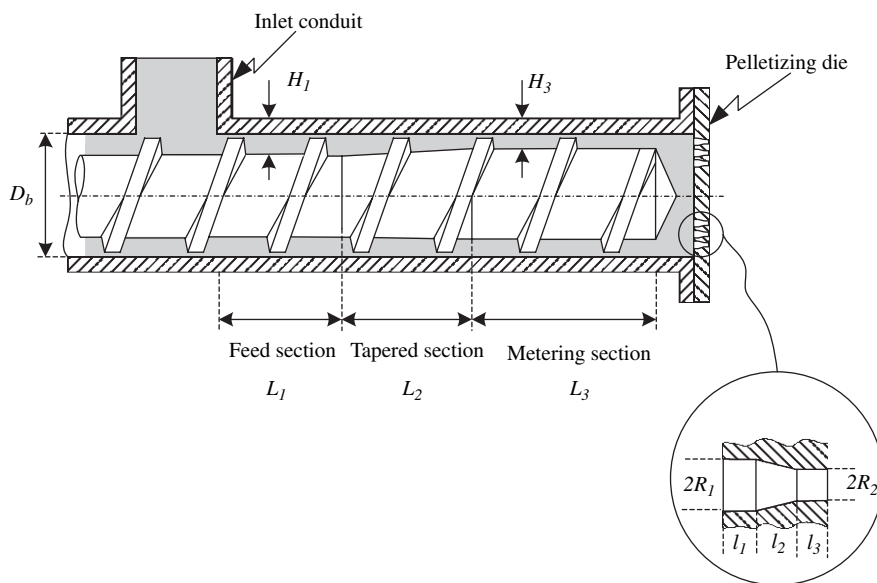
Schematic view of a melt extruder. The extruder is equipped with a feed port and a pelletizing plate.
